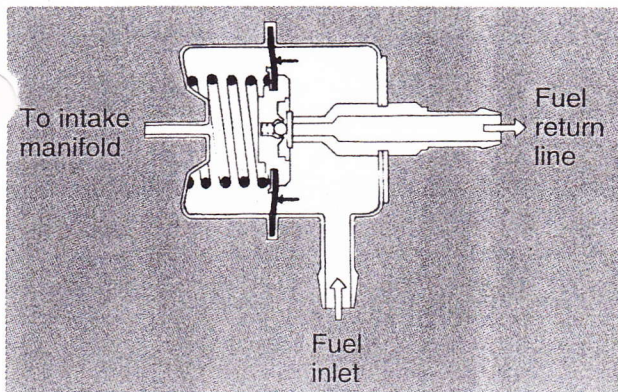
Fuel pressure regulator for port injection engines. *Courtesy of Chrysler Corporation
